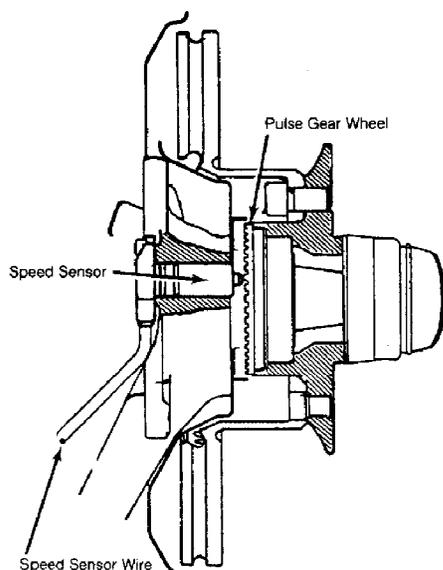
Cutaway View Of Mercedes-Benz ABS Front Speed Sensor Assembly
